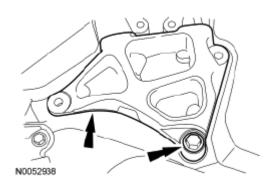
Identifying Alignment Pins Courtesy of FORD MOTOR CO.
